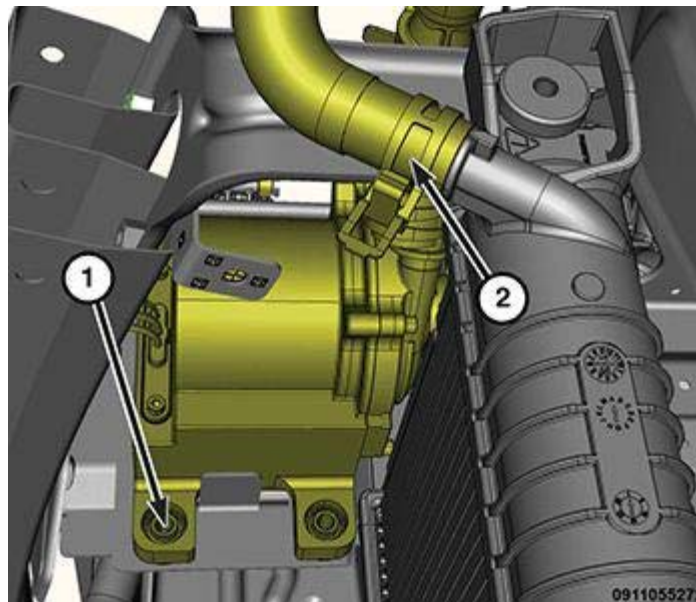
Lower Coolant Pump Mounting Nuts & Clamp
